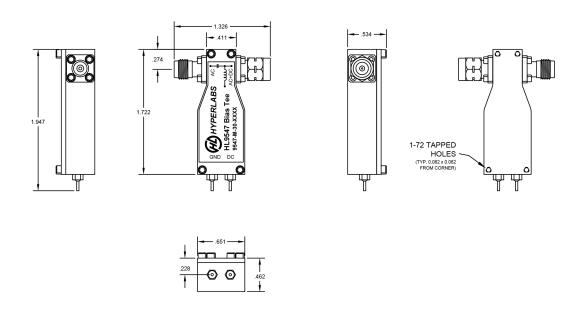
HL9547 with DC bias pins Mechanical Drawing
